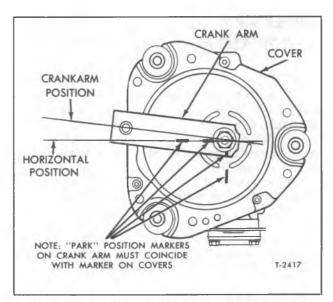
Crank Arm in Park Position (Tilt Cab Model)
